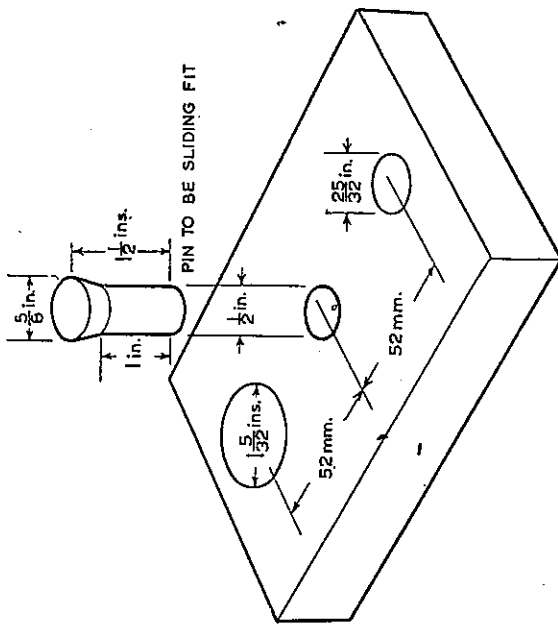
STEEL BLOCK FOR ASSEMBLING FLYWHEEL.
